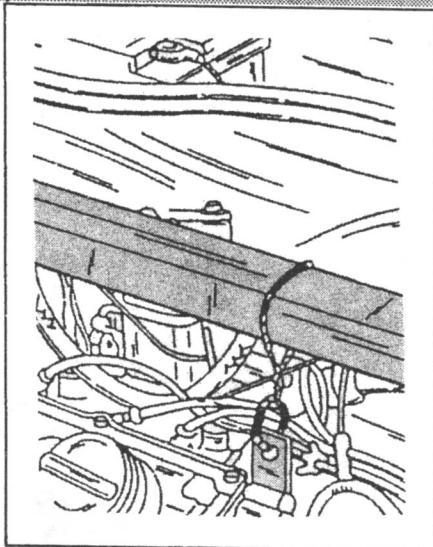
Lifting the engine out of its mountings with the home-made arrangement.
